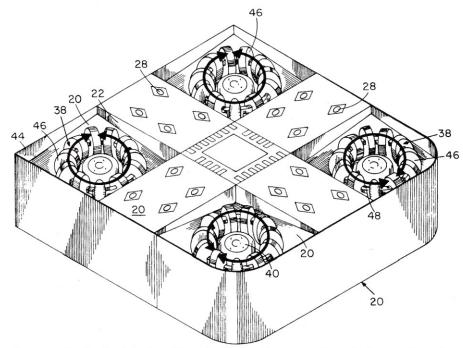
The details of the four drive wheel assemblies as seen from the bottom of the platform.
